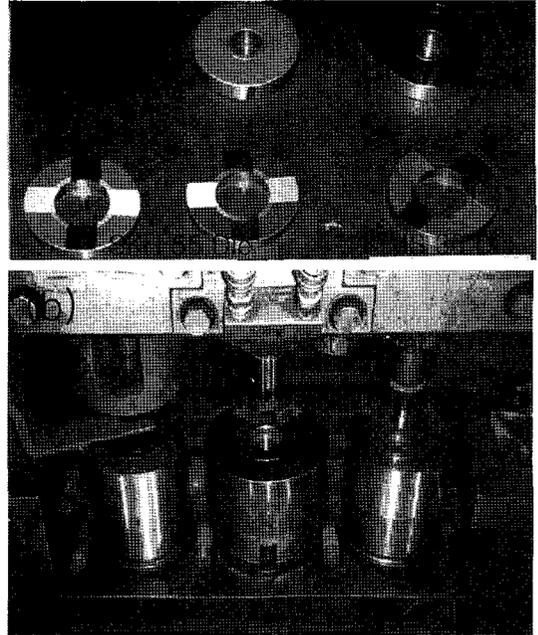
(a) Dies for hot forging of bearing race and (b) Hot former equipment.
